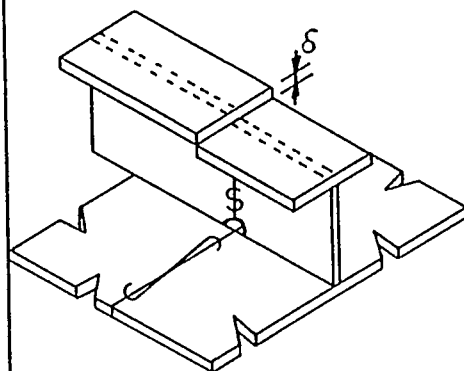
depicts a misalignment condition between member flanges. Five methods for correcting this misalignment are presented. Methods 1, 2 and 3 involve the removal of a section of the web plate and possibly of the flange and the rewelding of a tailored section which provides a continuous load path for the flanges. Methods 4 and 5 show the inclusion of a flange reinforcing member which requires less work but conversely will introduce higher stress concentrations.
